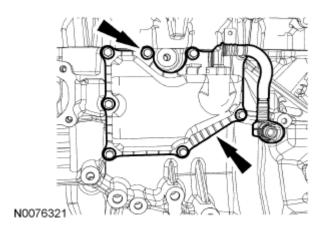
Locating Stud Bolt, A/C Compressor And Bolts Courtesy of FORD MOTOR CO.
